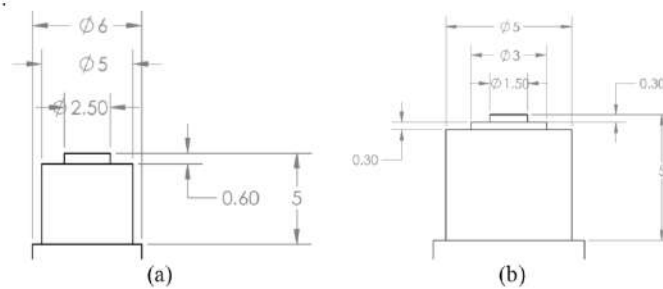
Tool dimensions of (a) pin 600 and (b) two-stage shoulder
